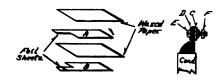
METHOD OF ASSEMBLING THE CONDENSER
